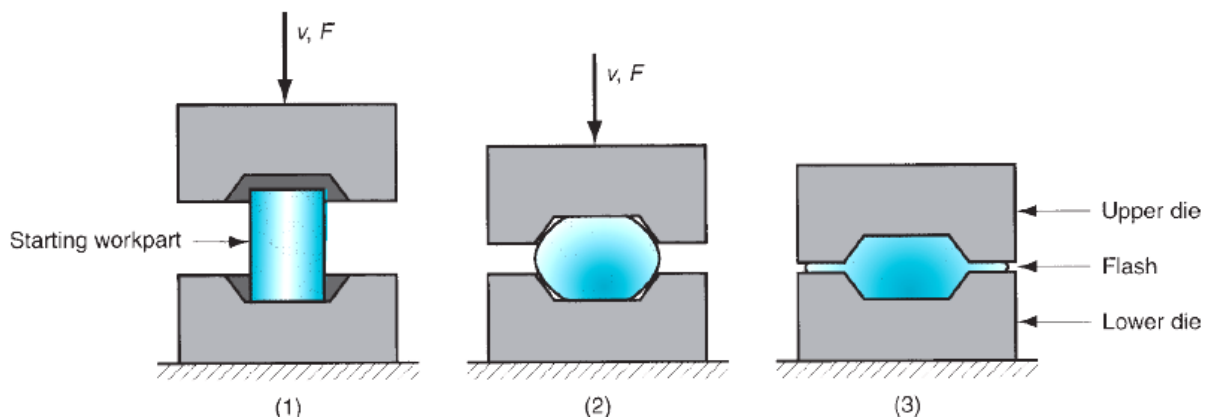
Sequence in impression-die forging: (1) just prior to initial contact with raw workpiece, (2) partial compression, and (3) final die closure, causing flash to form in gap between die plates.
